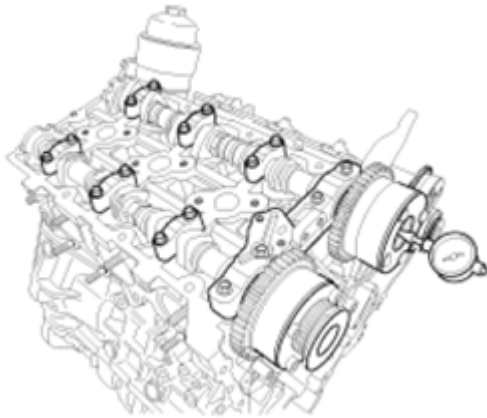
Measuring Camshaft End Play Using Dial Indicator
